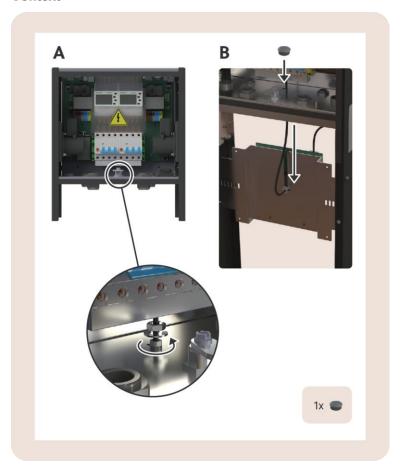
View on the antenna removal (A) and attachment to the LED holder (B)
